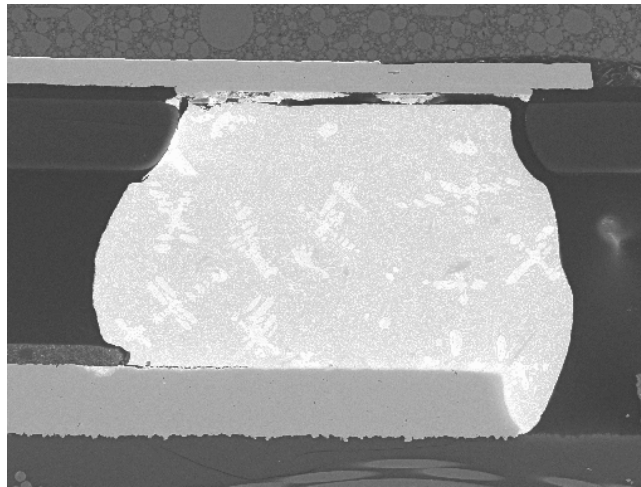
Cross Section of Failed Solder Joint (No Underfill).
